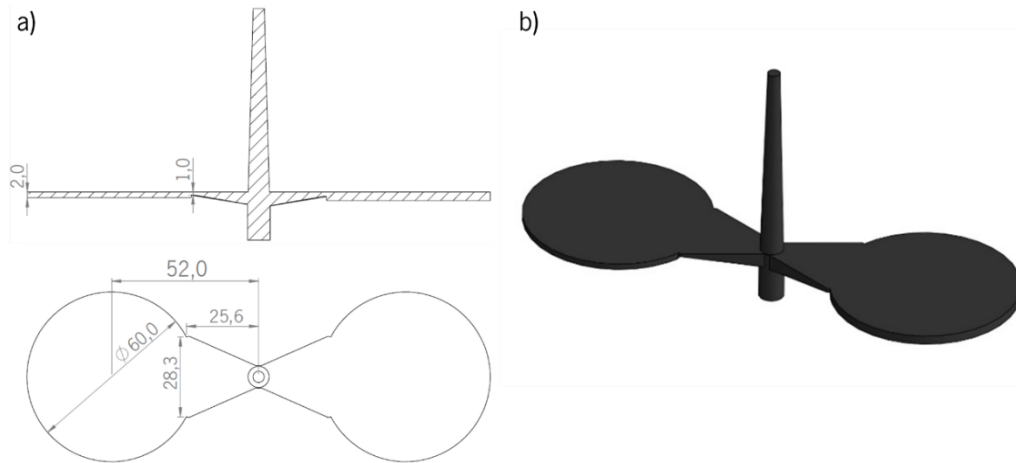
Injection moulding specimens: a) generic dimensions; b) 3D representation.
